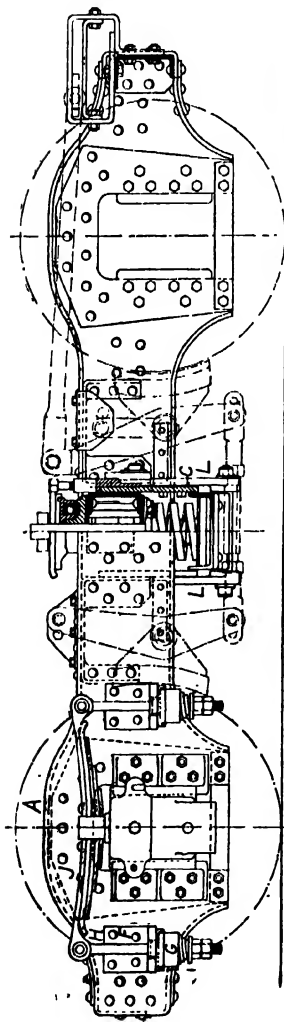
Top View of Motor-truck showing motors, brake-rigging, bolster, gussets and cross bracing.
